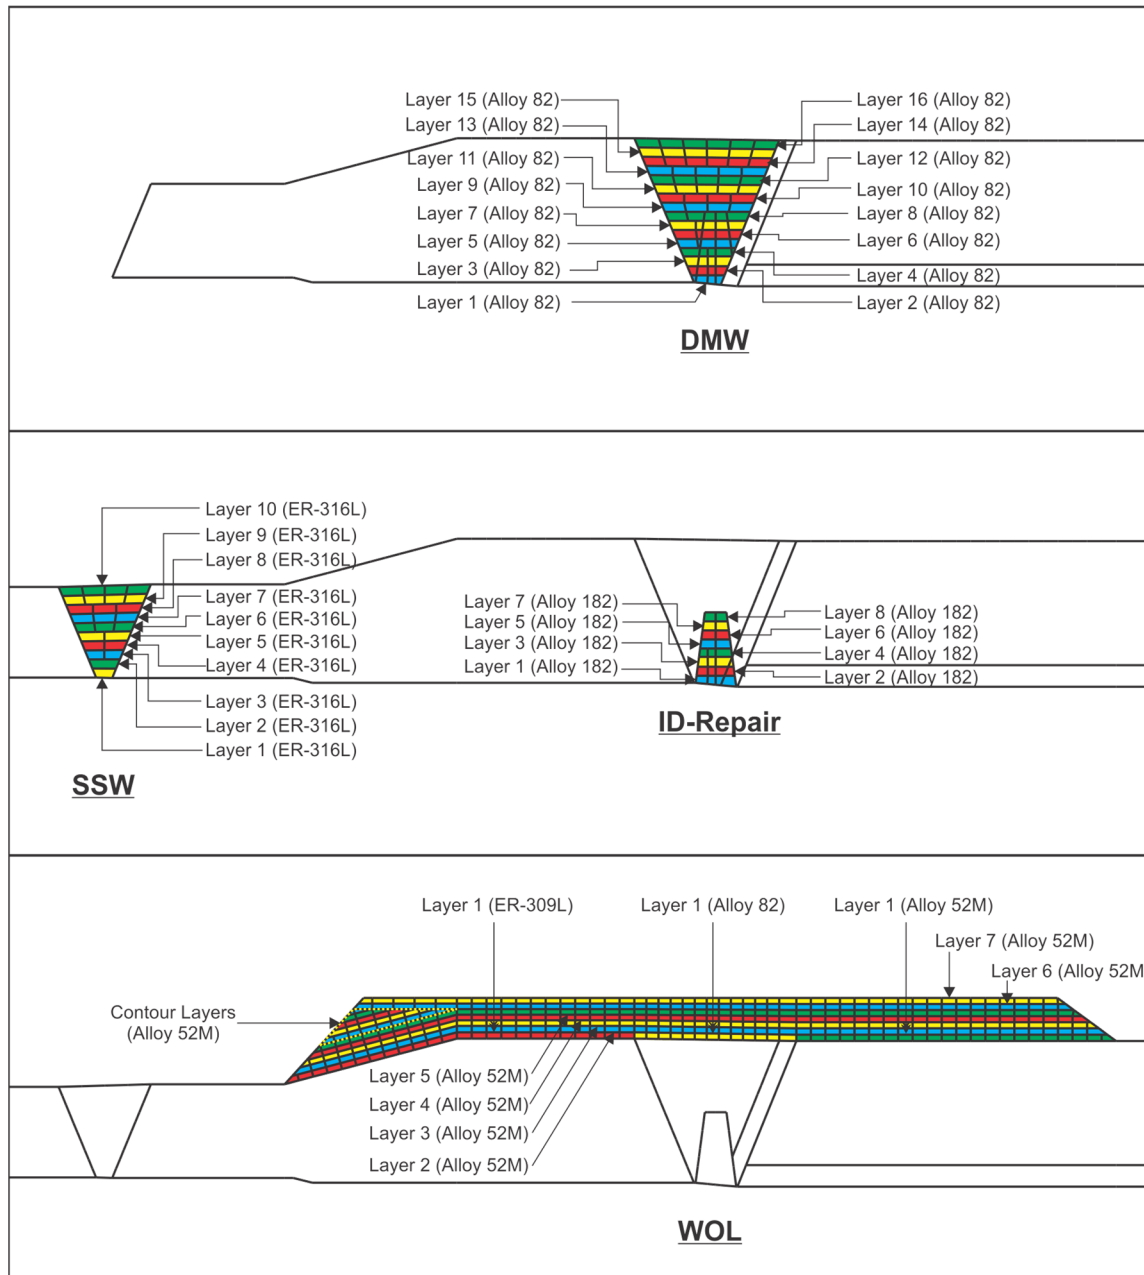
Finite Element Model for As-Built "Minimum" WOL Residual Stress Analysis showing Nuggets used for Welding Simulation
